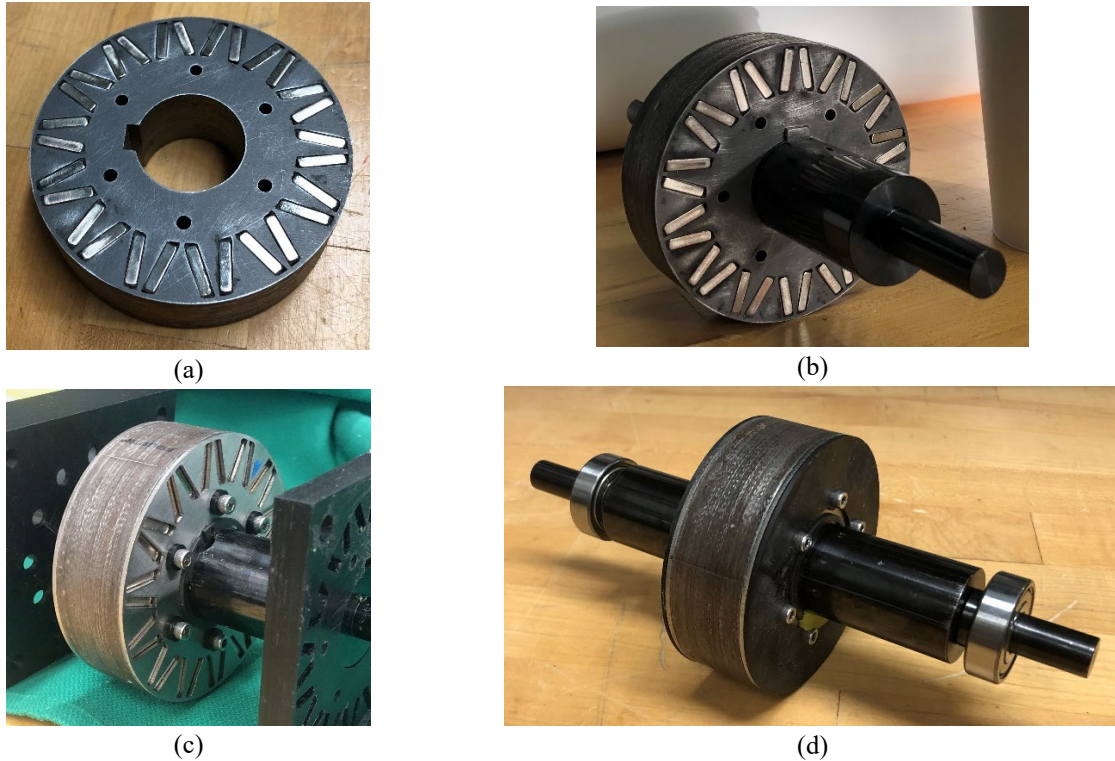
Rotor fabrication: (a) post magnet installation; (b) after key and shaft installation; (c) modified axial support endplate for rotor laminations; and (d) final rotor assembly before general assembly.
